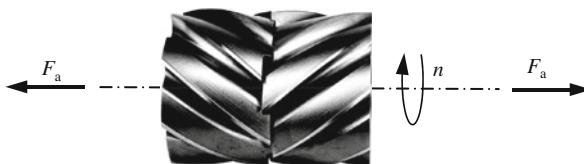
Combined plain milling cutter with opposite hand helix
